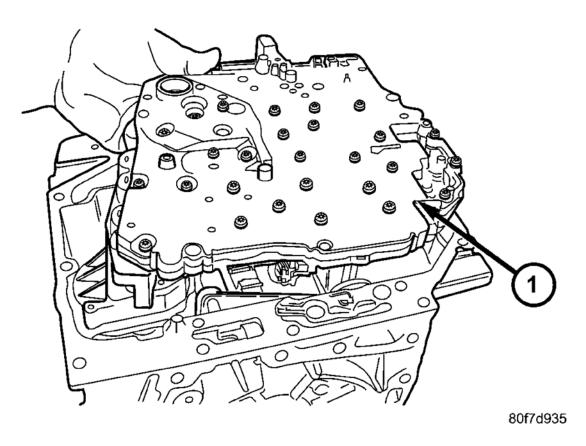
Removing/Installing Valve Body Courtesy of CHRYSLER LLC
